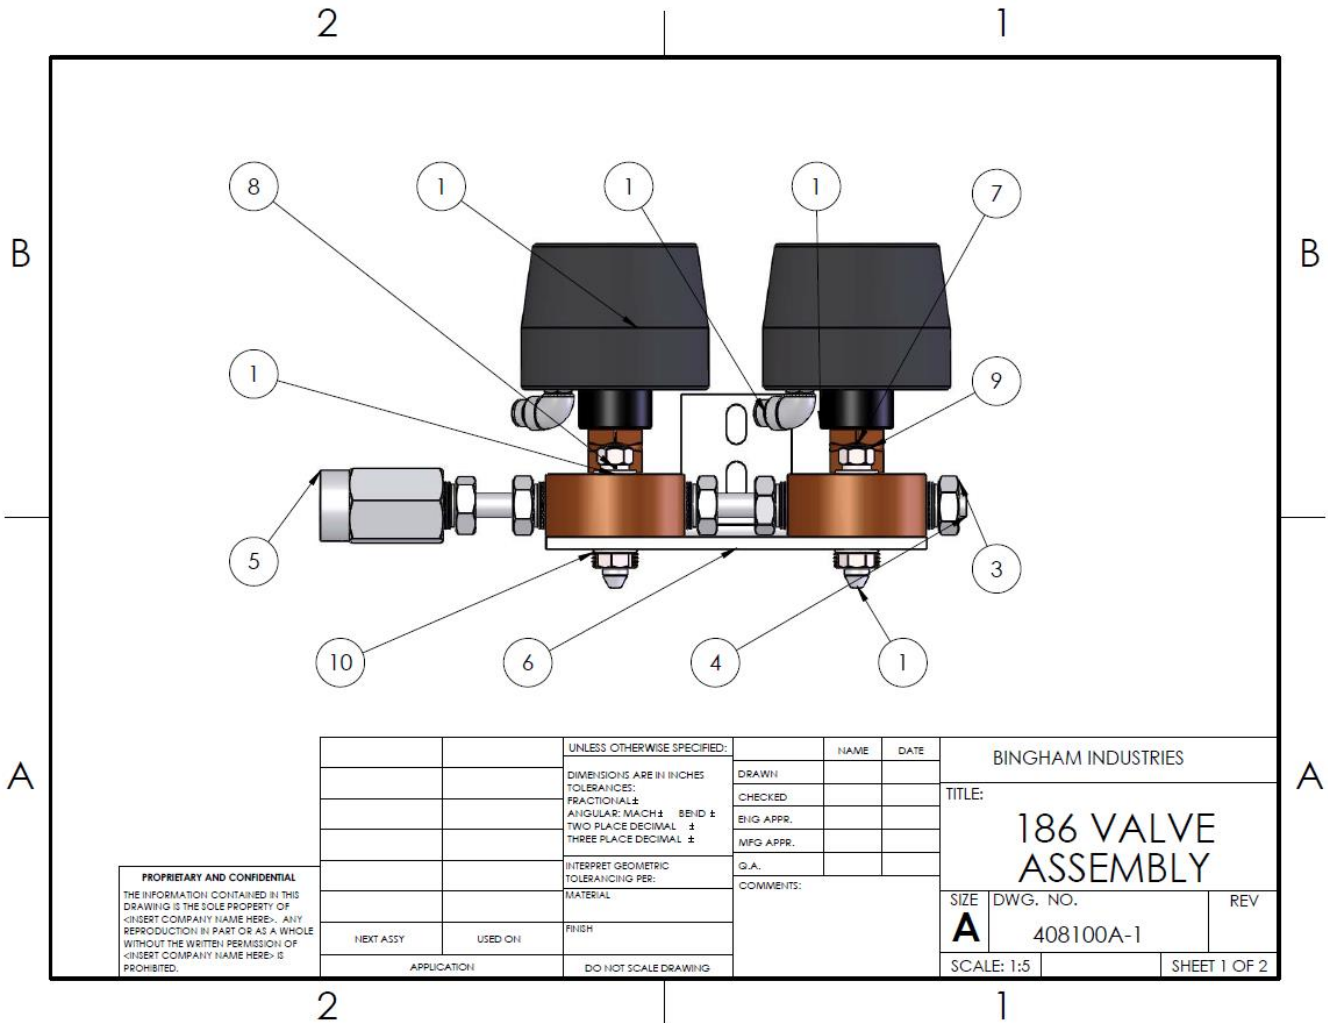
Drawing 408100A-1 186 Valve Assembly (sheet 1)
